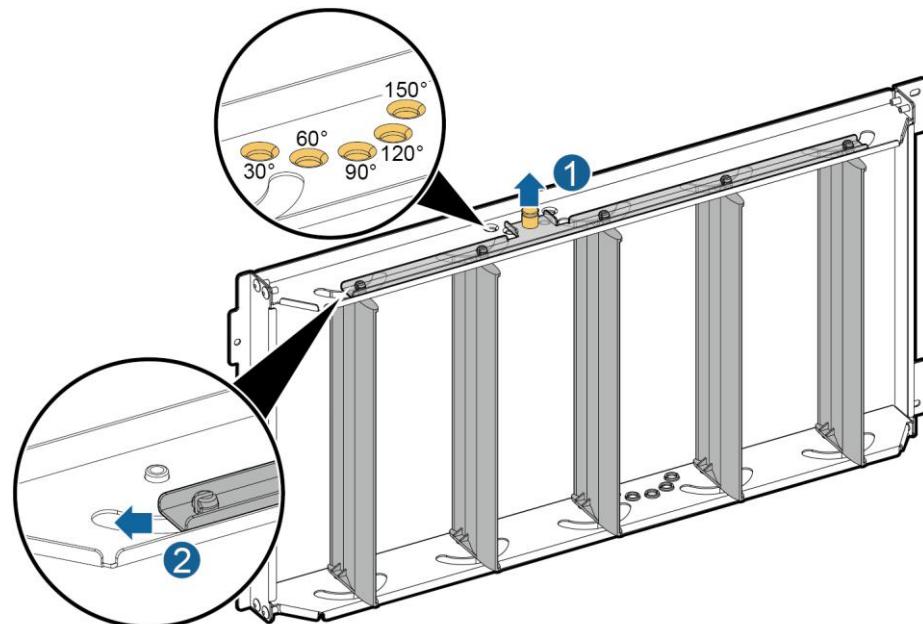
uses adjusting the air deflecting assembly to 30° as an example to illustrate how to adjust air deflecting assemblies.
